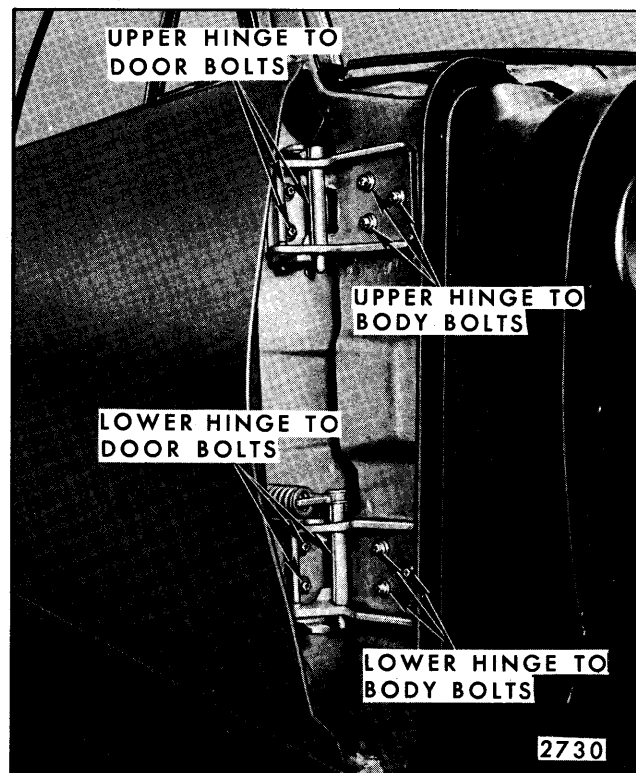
Front Door Hinge Attachment - "A" Styles
